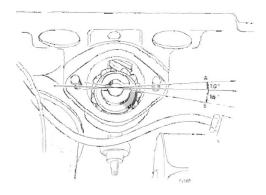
Position of slot in the distributor drive gear with No. 1 piston at T.D.C. on the compression stroke B - Spitfire A — Herald 1200, 12/50
